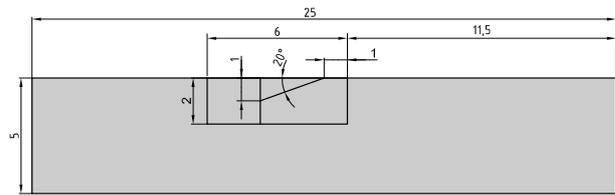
Dimensions of the Geometry Including a 1 mm Deep Initial Crack
